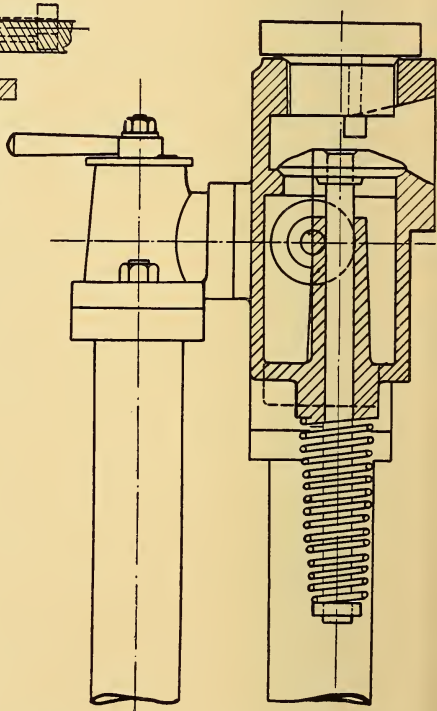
Inlet valve of a National Gas Engine. Mushroom type. Four Cycle Engine.
